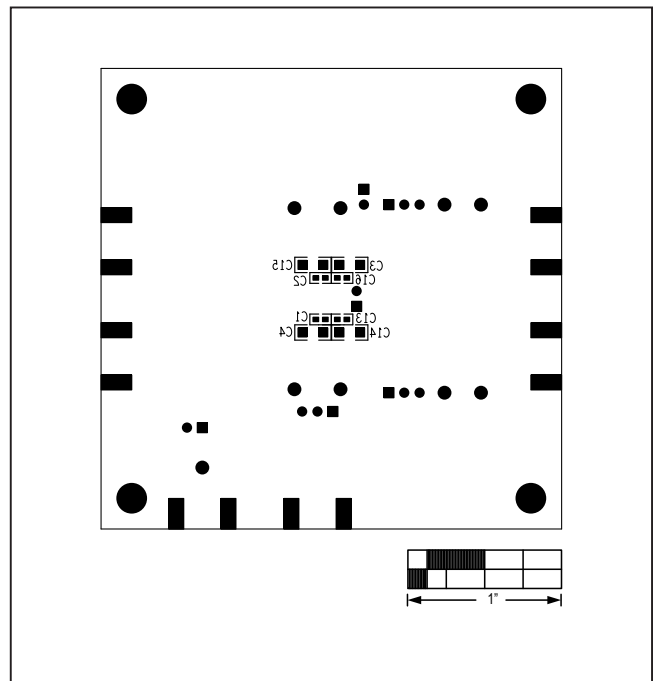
MAX44205 EV Kit Component Placement Guide—Solder Side
